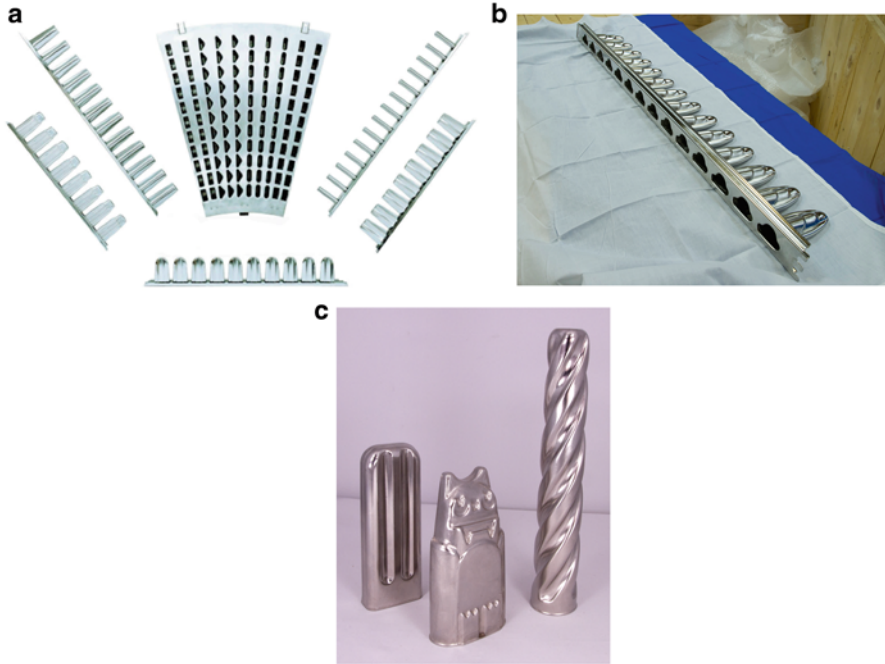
Pictures of various mold shapes for in-line or rotary molding machines (a) courtesy of WCB Ice Cream, Northvale, NJ, USA; (b, c) courtesy of Gram Equipment of America, Tampa, FL, USA
